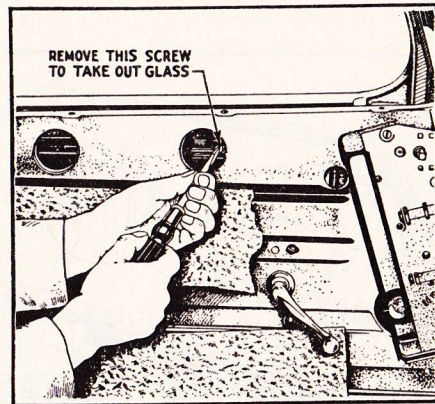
Showing Regulator Screw That Must Be Removed To Take Out Glass.
